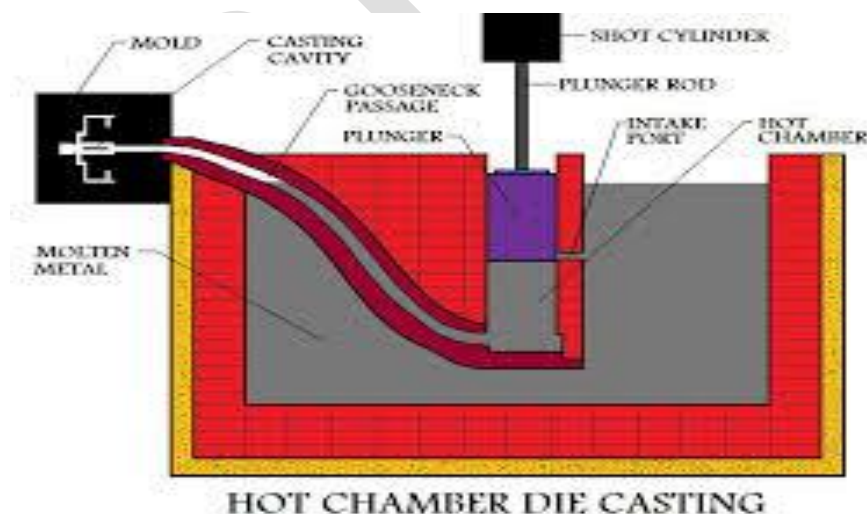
Hot Chamber of Die Casting (hydraulically plunger)
